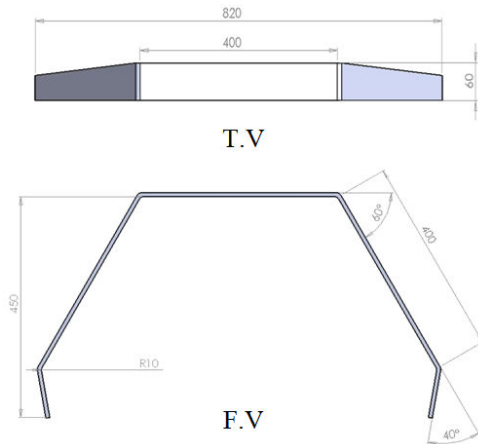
Geometry details of Model 2 (All dimensions in mm)
